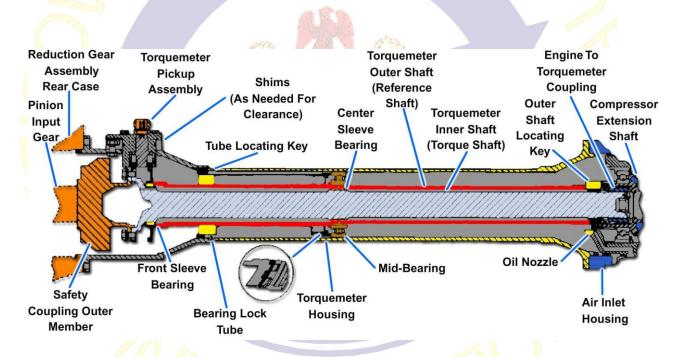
Torque Meter Assembly 1.18.2 Pre-Departure Checks
